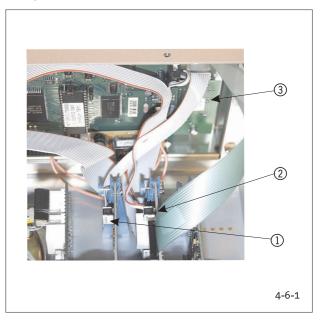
Position Panel Board (ON/OFF Key)
